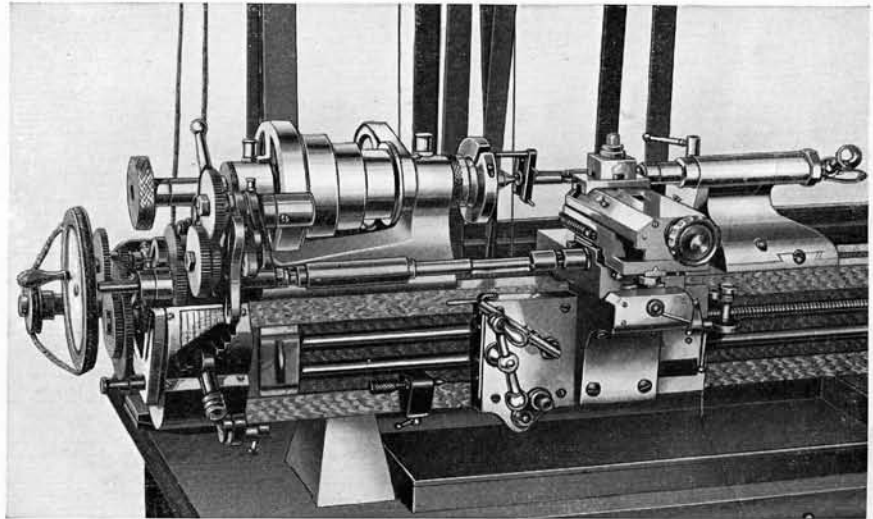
Rivett 608 (4 N.S.) lathe with quick change gear box, threading dial and set over tailstock, with Universal Relieving Attachment, relieving a tap held on centers
